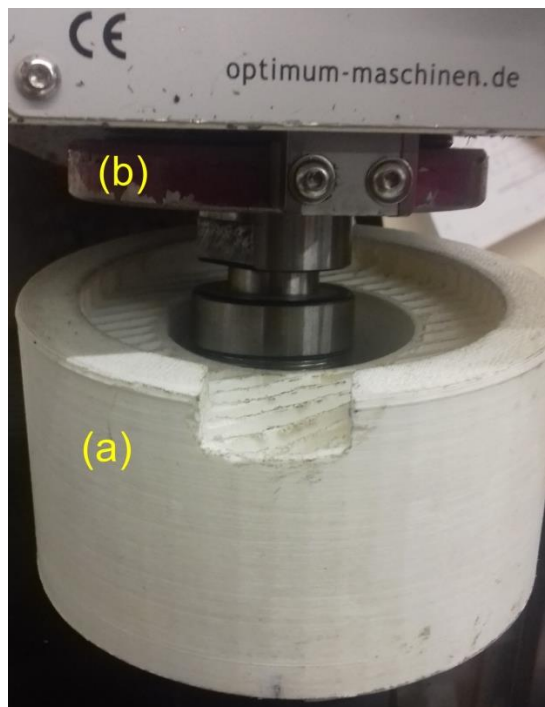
Top part (a) assembly on the stationary head of the machine (b).
